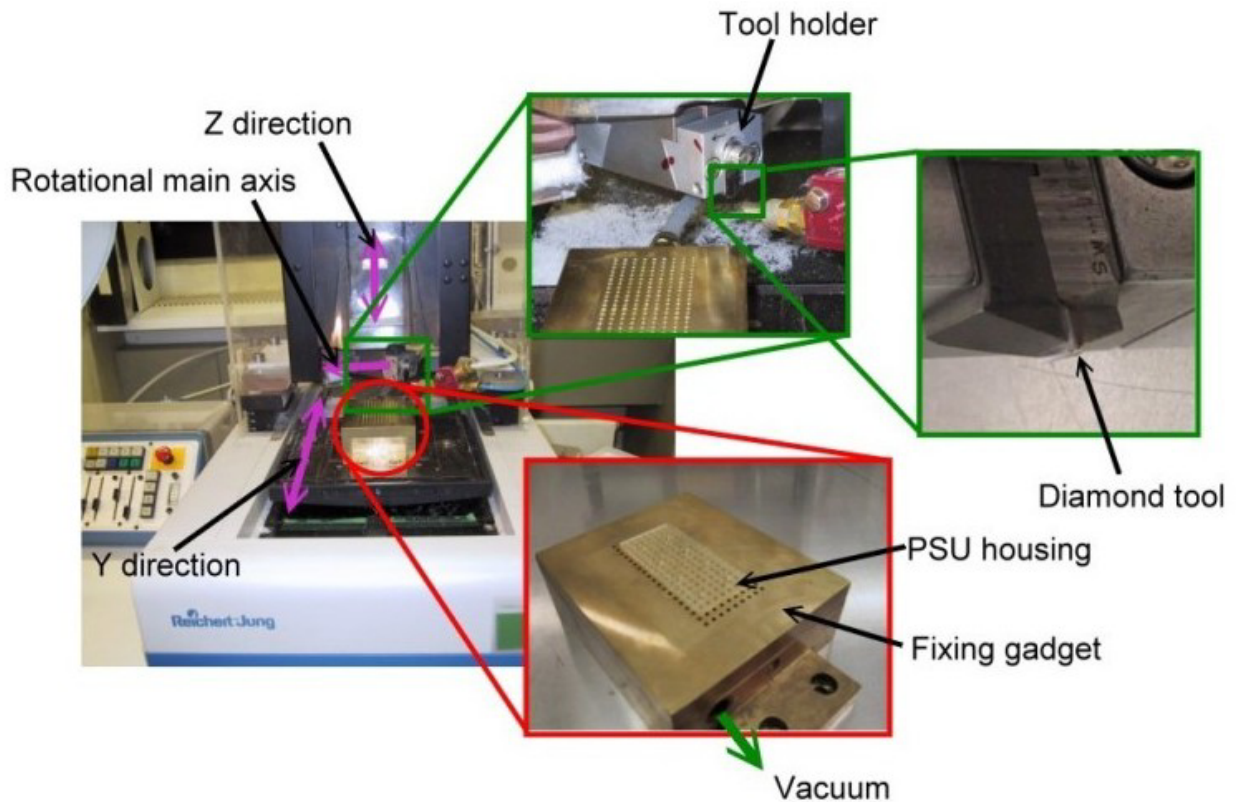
Polymer housing trimming and polishing machine using diamond tools.
